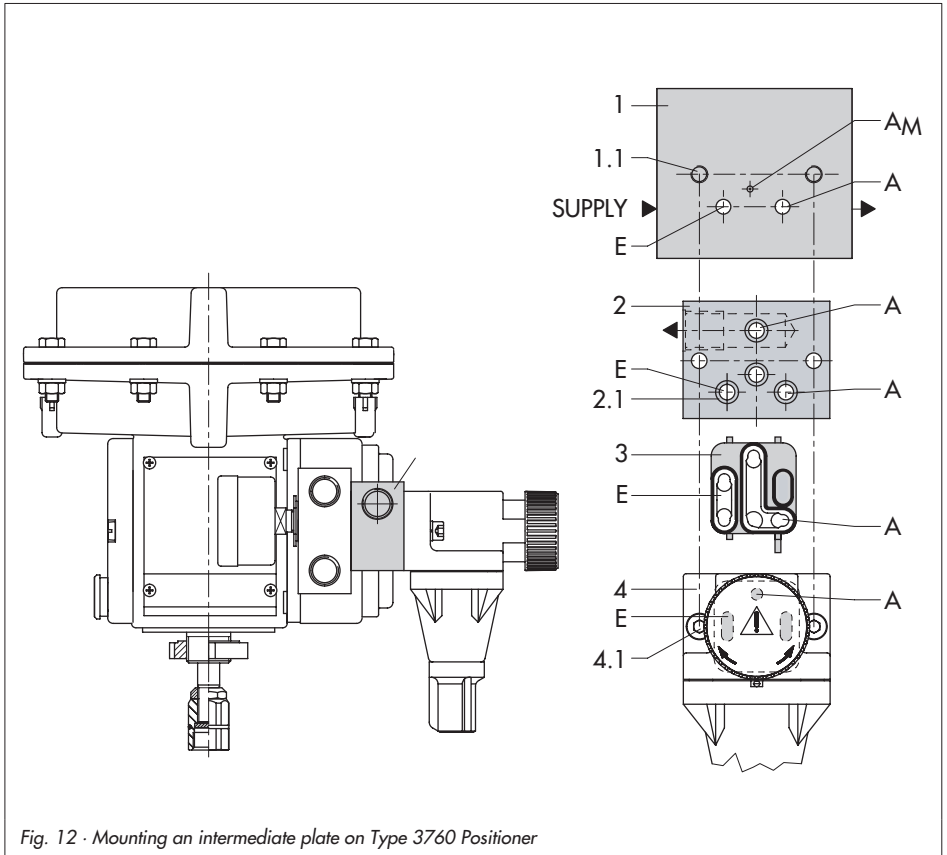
· Mounting an intermediate plate on Type 3760 Positioner
